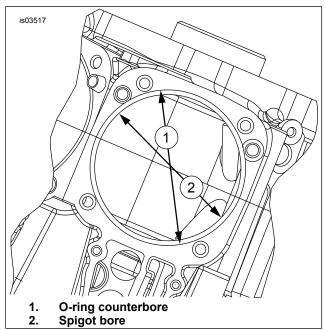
Spigot Bore and O-Ring Counterbore Dimensions
